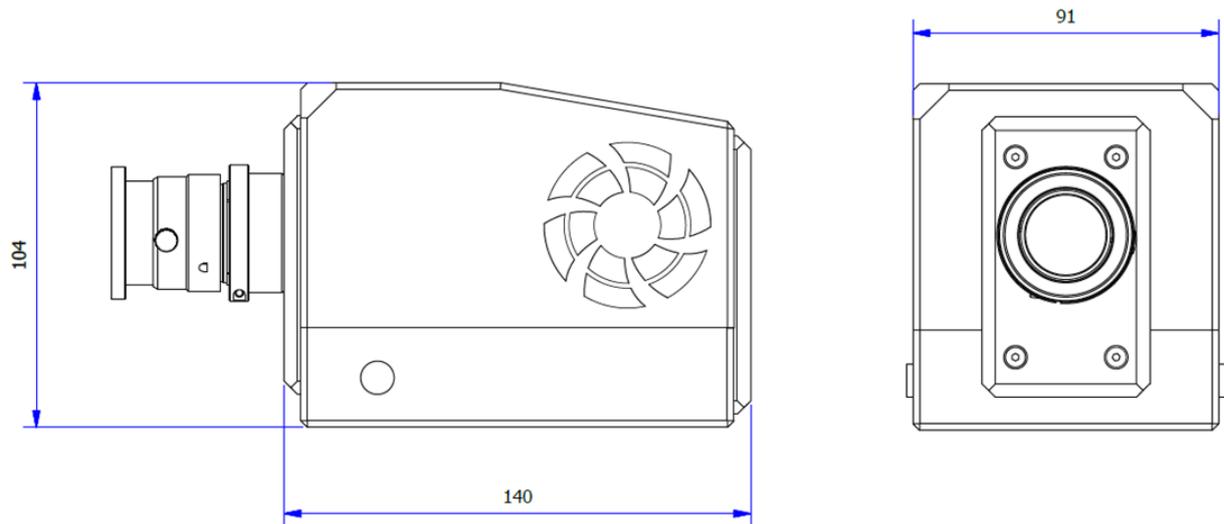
External dimensions of the camera body (all dimensions are in millimeter)
